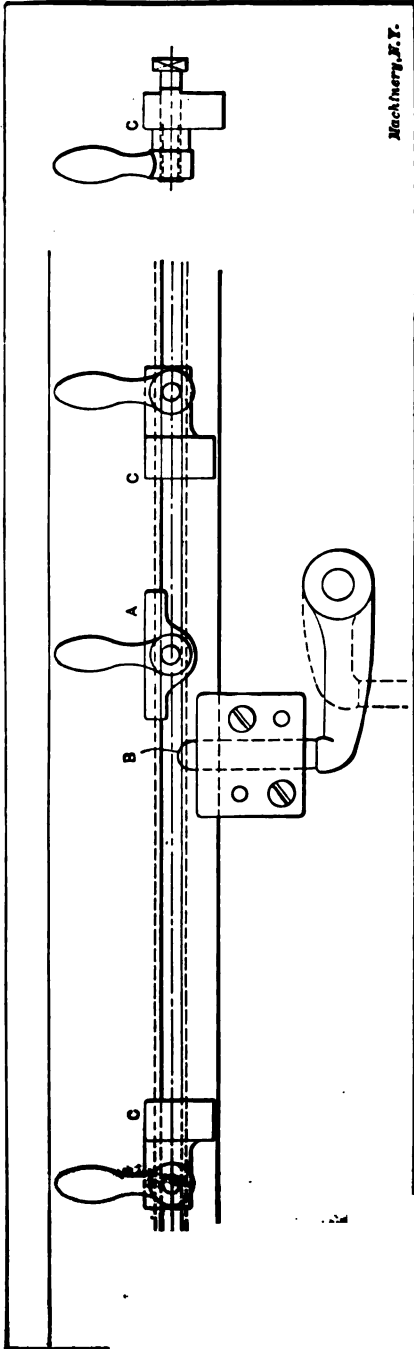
Combined Trip and Dead Stops for Milling Machine Table
